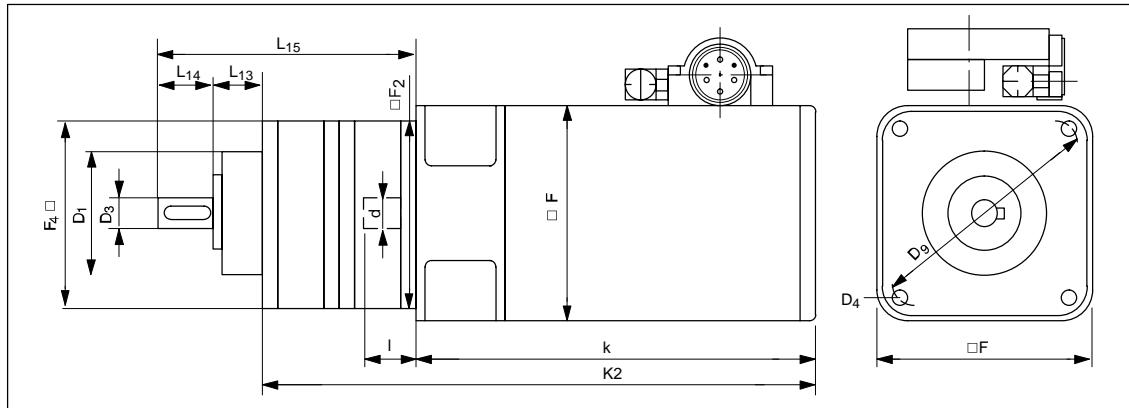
1FT5 series with 1-stage planetary gearbox (alpha company), dimensions, refer to Table 3-7
